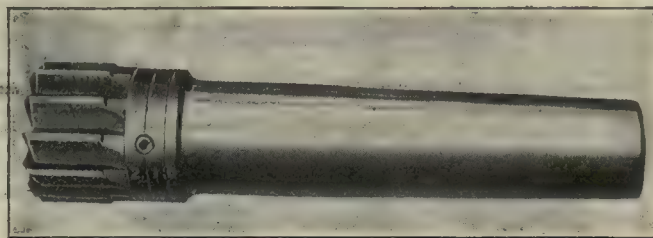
ARBOR WITH THREADED END MILL IN PLACE
